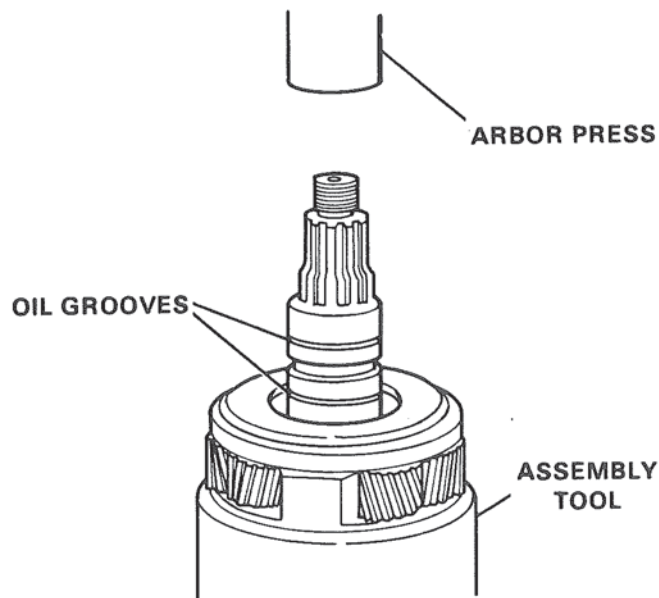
Pinion Cage and Output Shaft Assembly with Oil Grooves.
